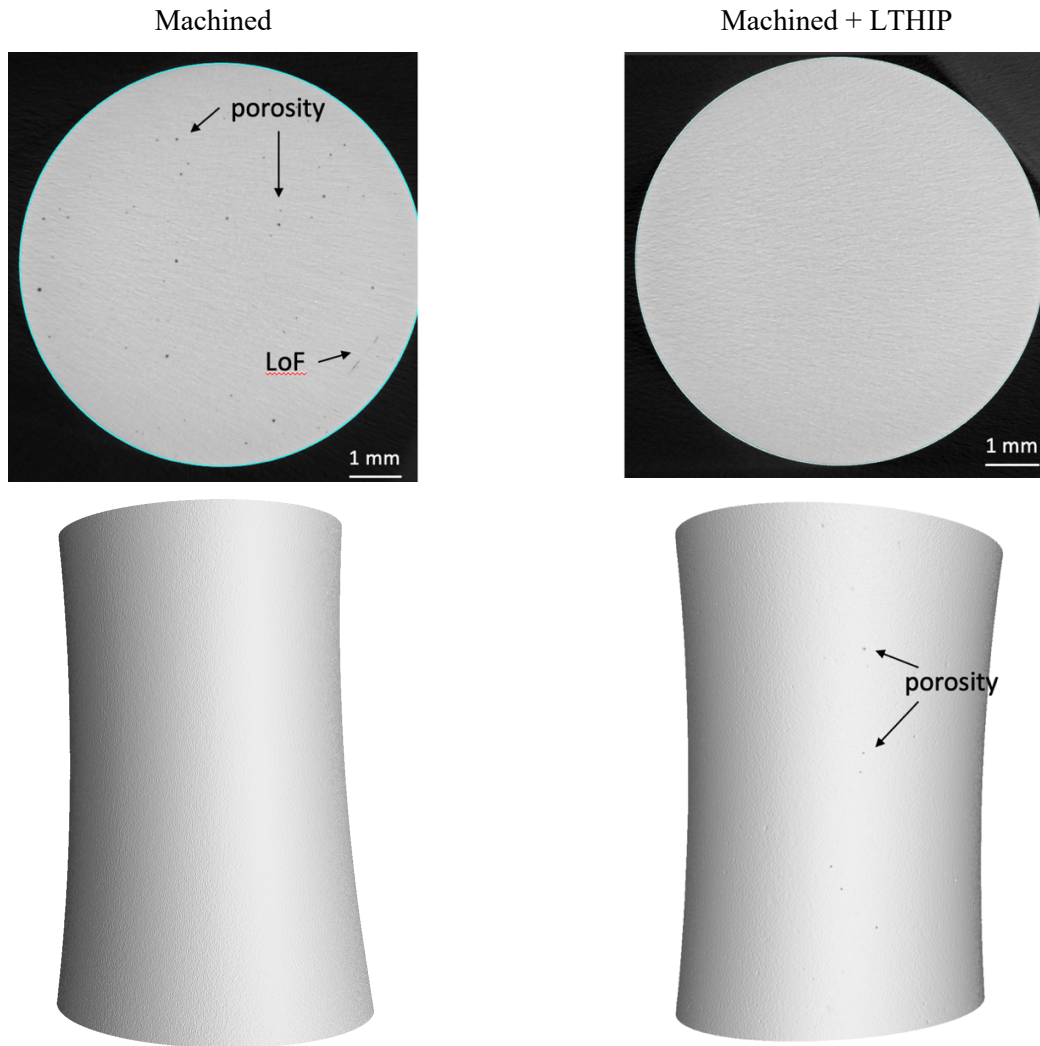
The 3D reconstruction of the surface and the internal view of the As-Built and HIP samples. Porosity and LOF defects are observed in the As-Built condition, while surface machining has removed any existing surface defects. Porosity and LOF defects are not observed in the HIP bulk material, however, surface porosity was observed.
